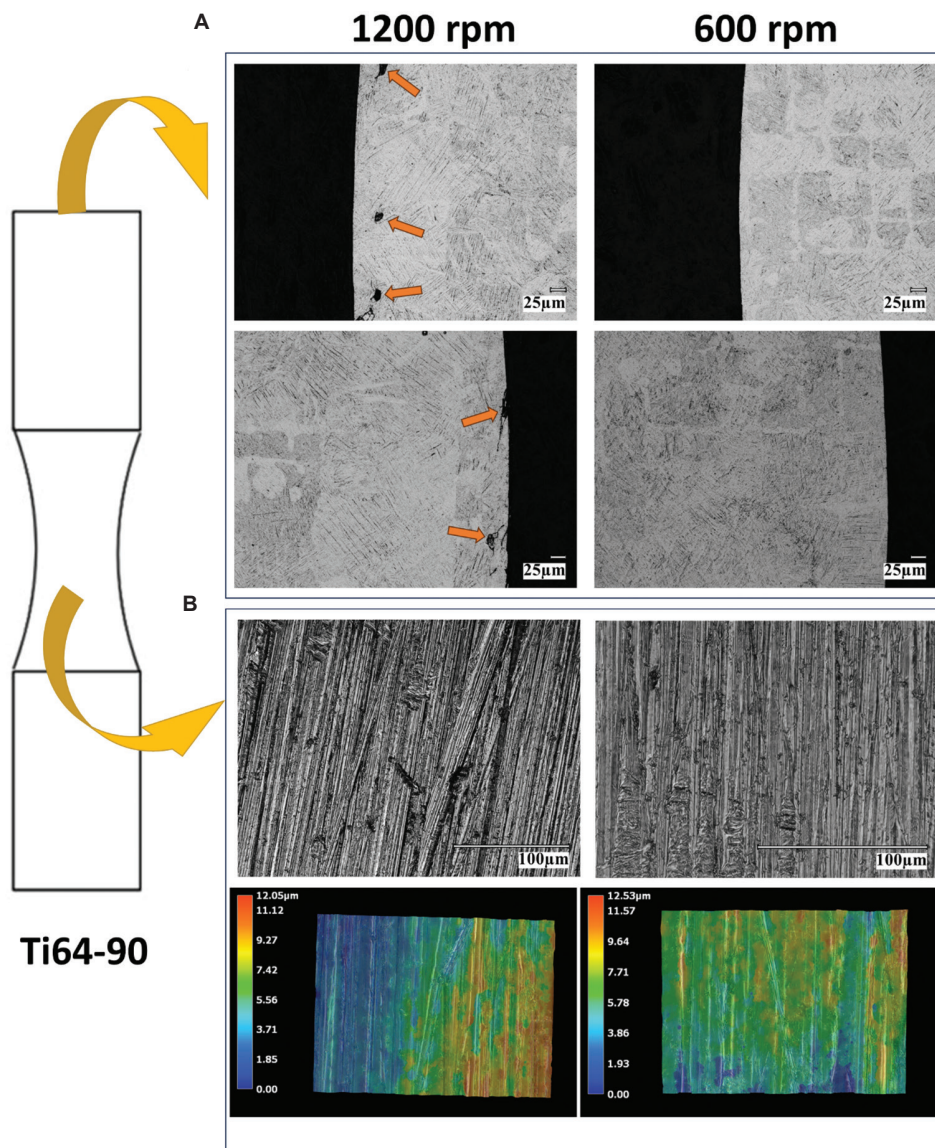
Effect of machining revolutions per minute on the surface of Ti64-90 fatigue specimens. (A) High-magnification images of the top surface of the fatigue specimens with machined surfaces at 1200 and 600 rpm. Defects are observed on the periphery of the surface of samples machined at 1200 rpm, while those machined at 600 rpm show a clean outer surface. (B) High-magnification images of the gauge region of the fatigue specimens post-machining, and depth profiling representing the surface roughness. Fatigue specimens machined at 1200 rpm display rugged surfaces with depth profiling indicating large variation in depths at the gauge region, signifying higher surface roughness. Specimens machined at a lower speed at 600 rpm display lower ruggedness at the gauge area, with surface depth profiling indicating a more uniform pattern and a lower surface roughness than that for 1200 rpm specimens.
